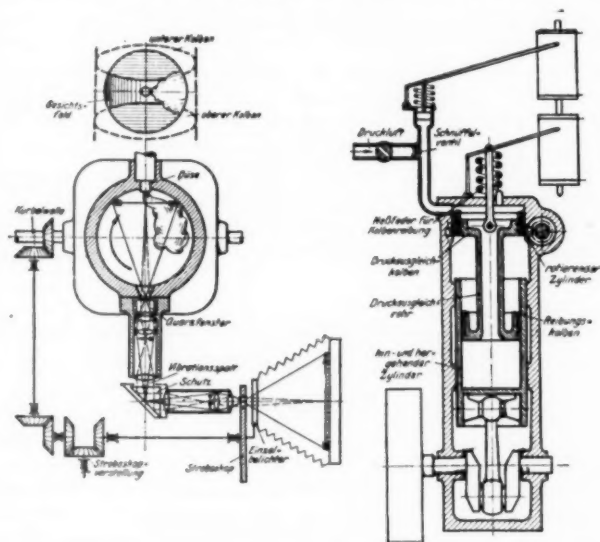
TESTING DEVICES FOR OIL ENGINES—LEFT, APPARATUS FOR OBSERVATION OF FLAME OF COMBUSTION IN THE CYLINDER; RIGHT, DEVICE FOR MEASURING PISTON-RING FRICTION
